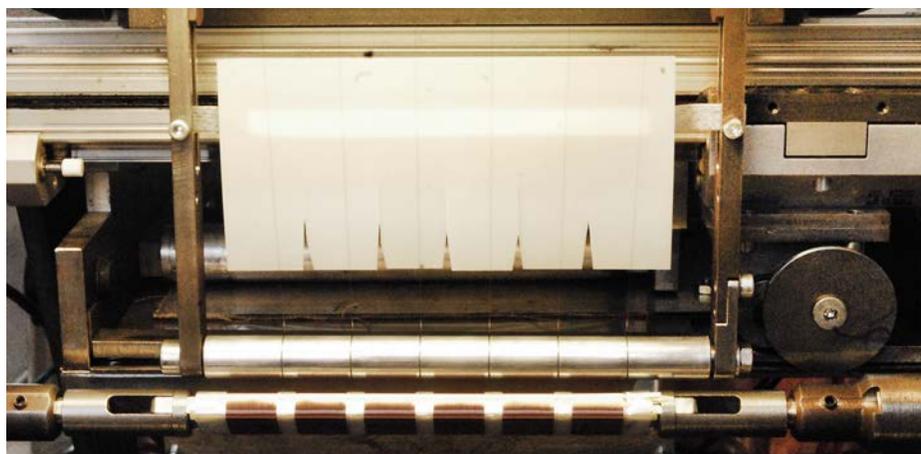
Close-up showing reusable mandrel and "stick" winding method.
